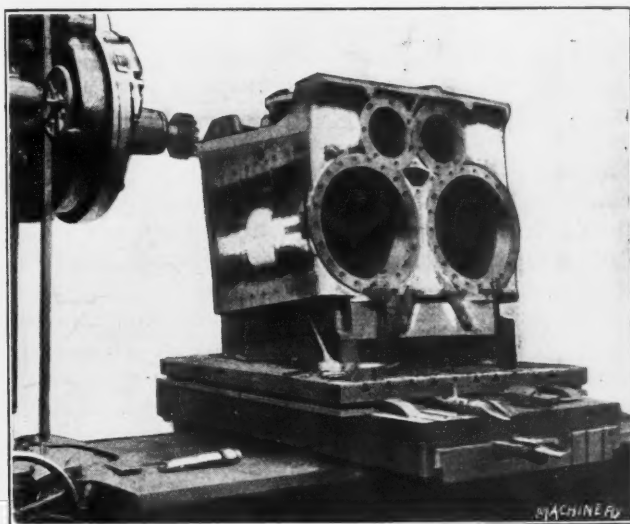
Milling Taper Side Faces of Cylinder Shown in Fig. 6
